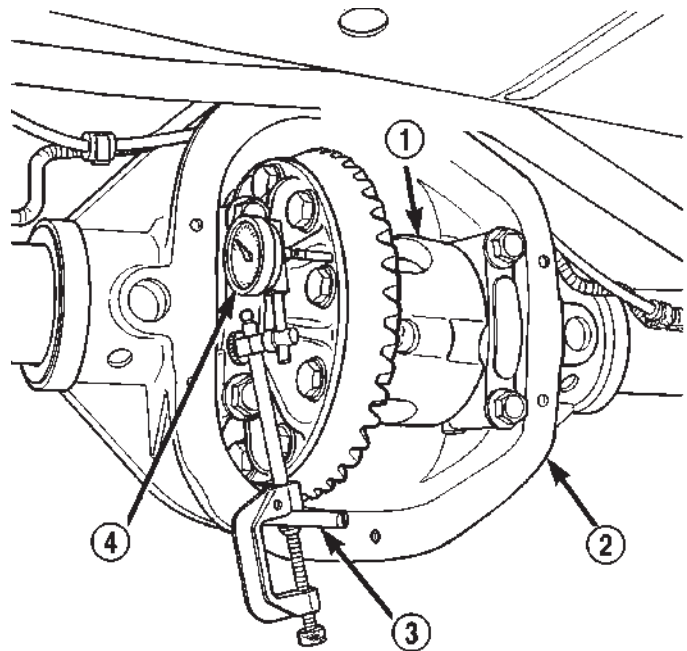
Seat Ring Gear Side Differential Dummy Bearing
